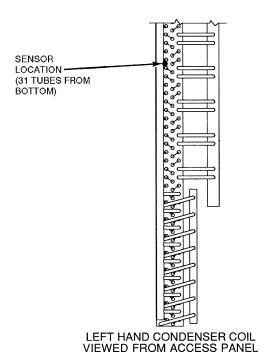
C — Motormaster III Sensor Location (48AJ,AK,AW,AY040, 050 and 48EJ,EK,EW,EY048)
